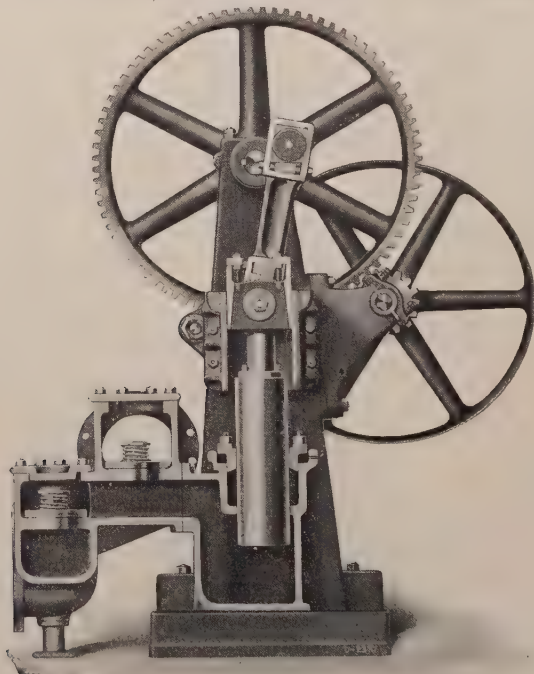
Typical section of Worthington Vertical Power Pump. Single-acting plunger type.
